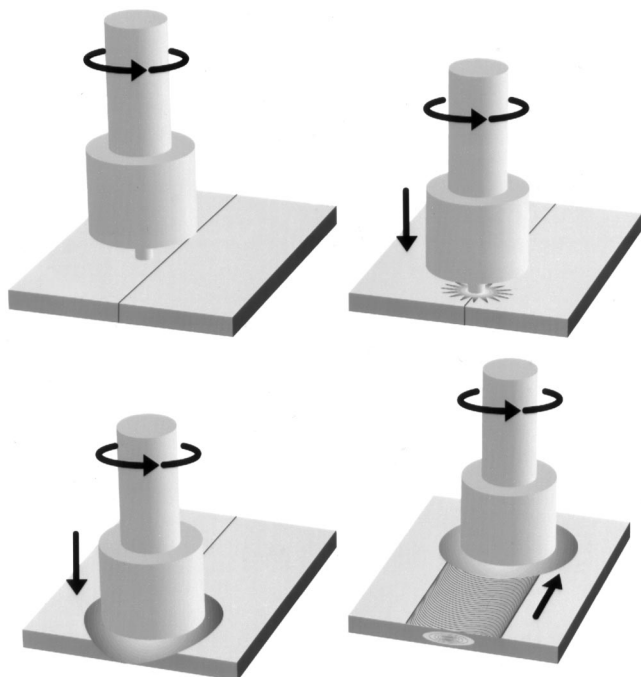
Schematic illustration of the friction-stir-weld process: (a) rotating tool prior to penetration into the butt joint; (b) tool probe makes contact with the part, creating heat; (c) shoulder makes contact, restricting further penetration while expanding the hot zone; and (d) part moves under the tool, creating a friction-stir-weld nugget.
